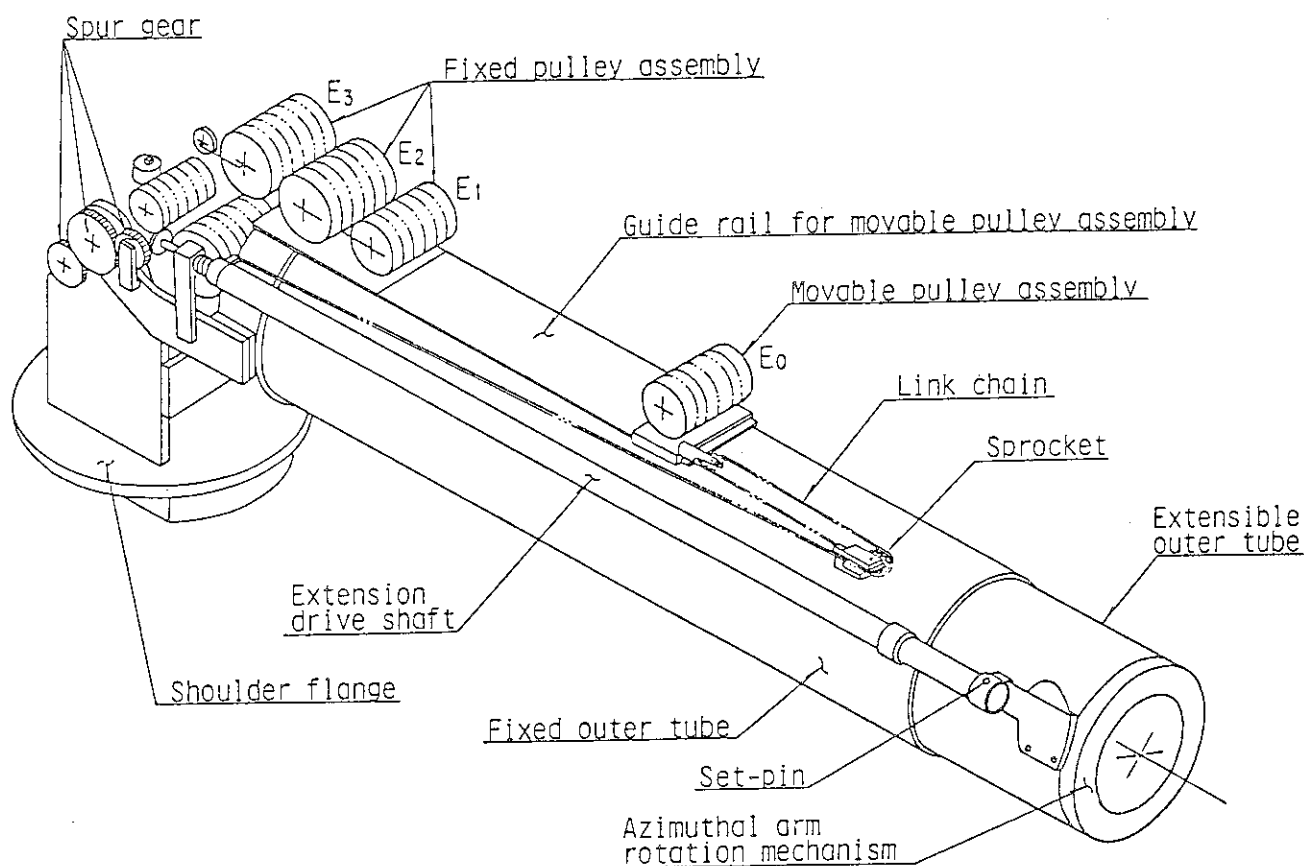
Perspective view of slave arm extension mechanism of the type A 100 extended reach manipulator
